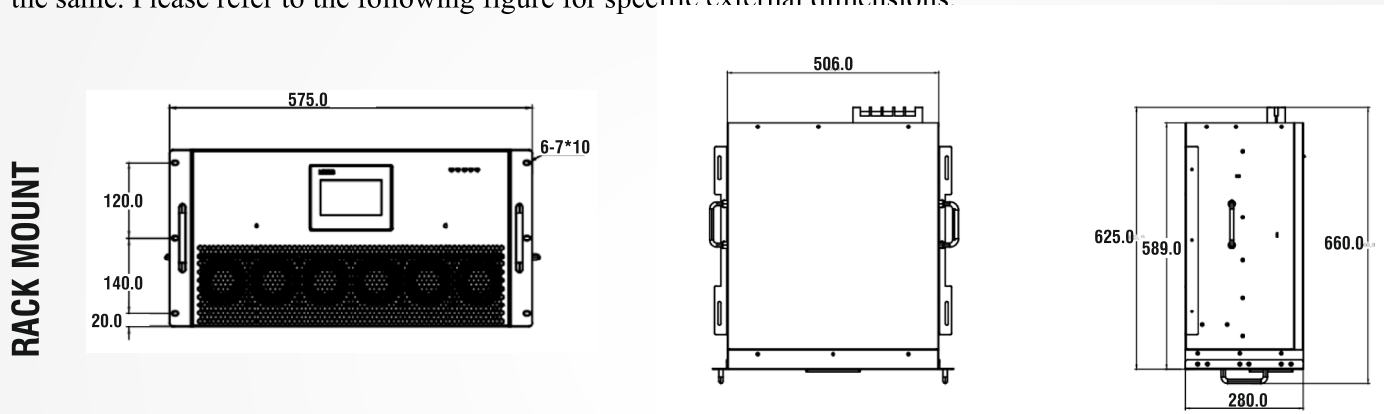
1 Overall Dimension Drawing (Unit: mm) of Rack AHF Module
